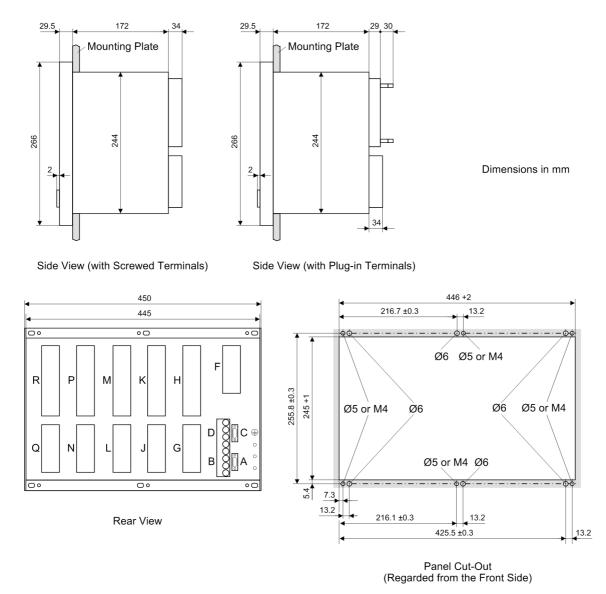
Dimensional drawing of a 7UT633 or 7UT635 for panel flush mounting (housing size 1/1)
